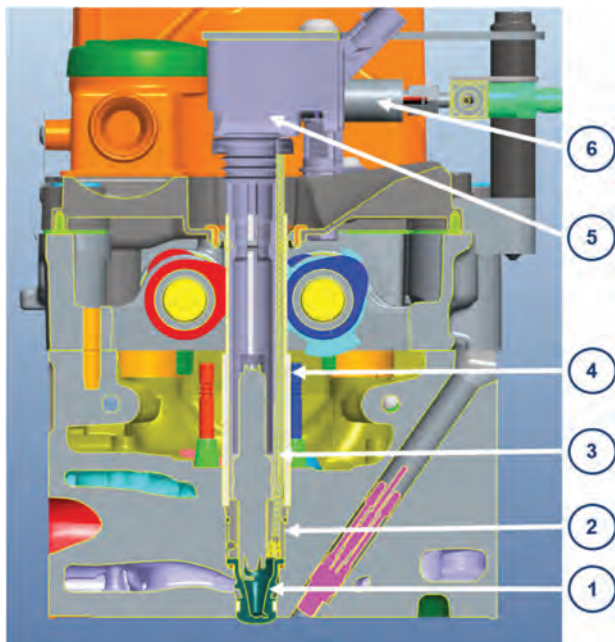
Section view through cylinder head of GasOn engine with prechamber
